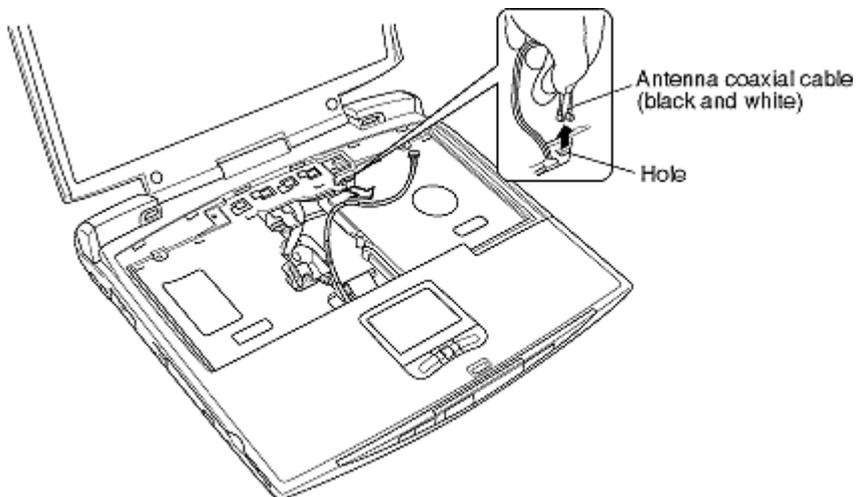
Pulling the antenna coaxial cables out of the hole
